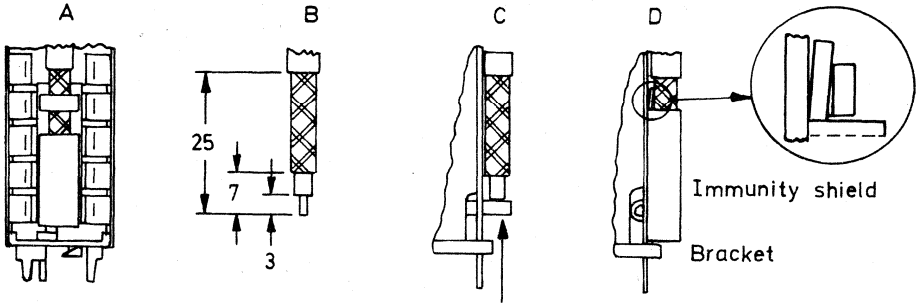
Fixing of the aerial cable. Inner conductor soldered on aerial tag. Recommended cable: DAVU wire CX4004 (outer sheath diameter 5,32 mm).
